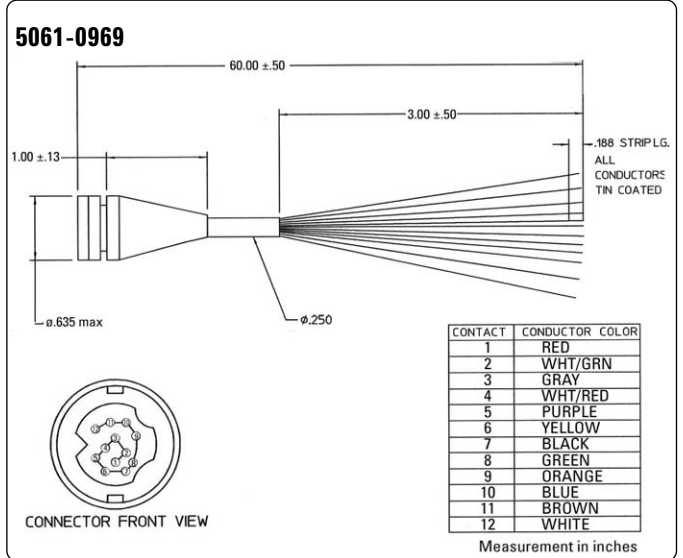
5061-0969 12-pin conductor cable, bare wire to Viking connector (for five switches), 60 inches long
